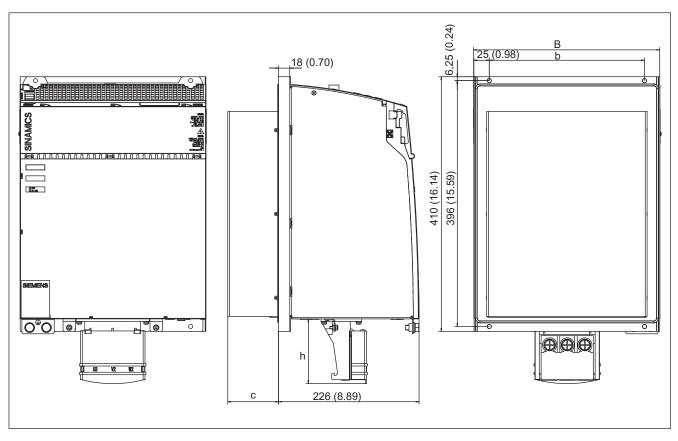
Dimension drawing of 132 A and 200 A Motor Modules Booksize with external air cooling, all dimensions in mm and (inches)
